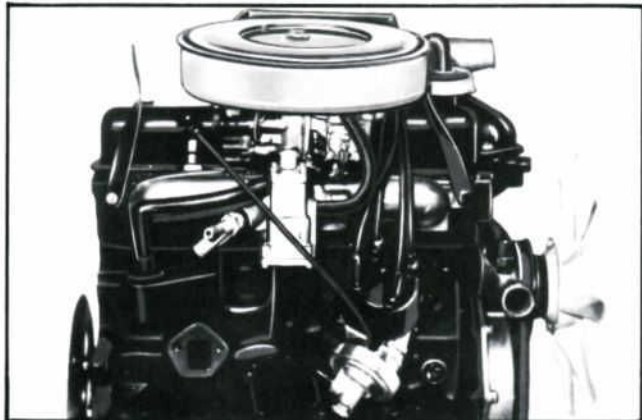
Side View of 97.6 Cubic Inch (1600 cc) Engine
